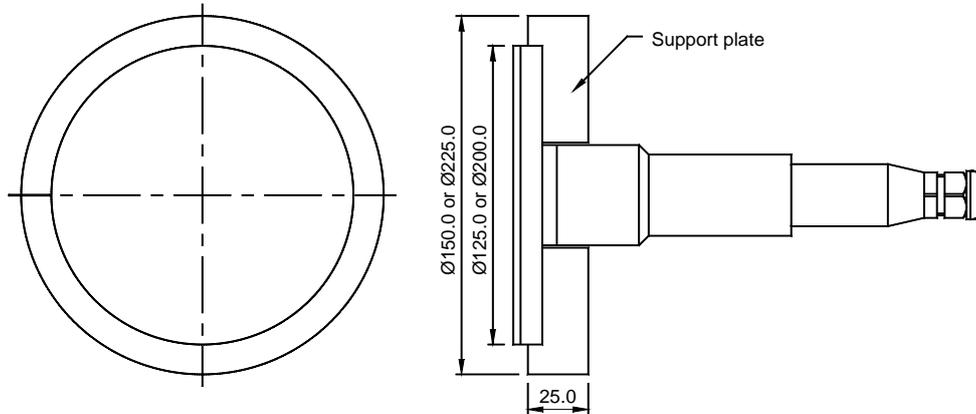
jack-out pressure cell with support plate (dimensions in mm)
